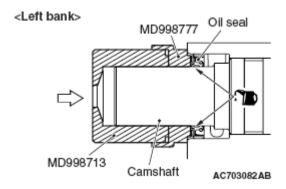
Installing Camshaft Oil Seal (Left Bank)
